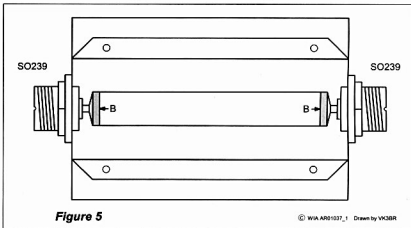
View of centre conductor (1/2 inch diameter) between SO239 sockets (length not critical). End pieces (B) cut from 20 gauge brass and soldered in slots. Screw fastenings of square box over centre conductor and SO239 sockets not shown.
